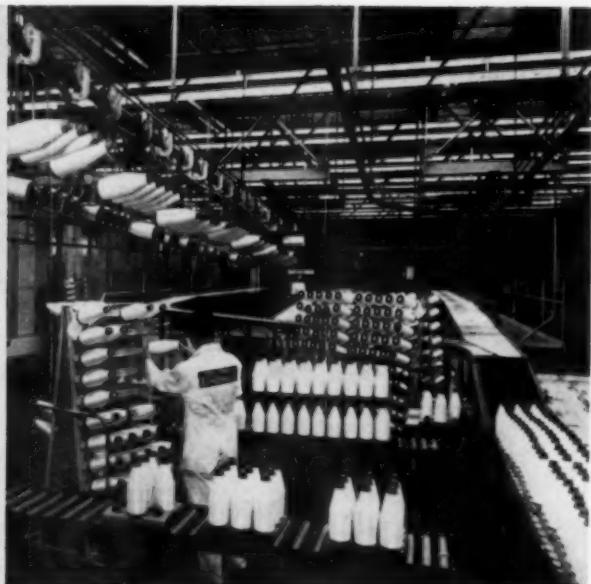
Above Left — Automatic switching of overhead conveyors brings filled original drawing bobbins from forming ovens to twisting frames.
